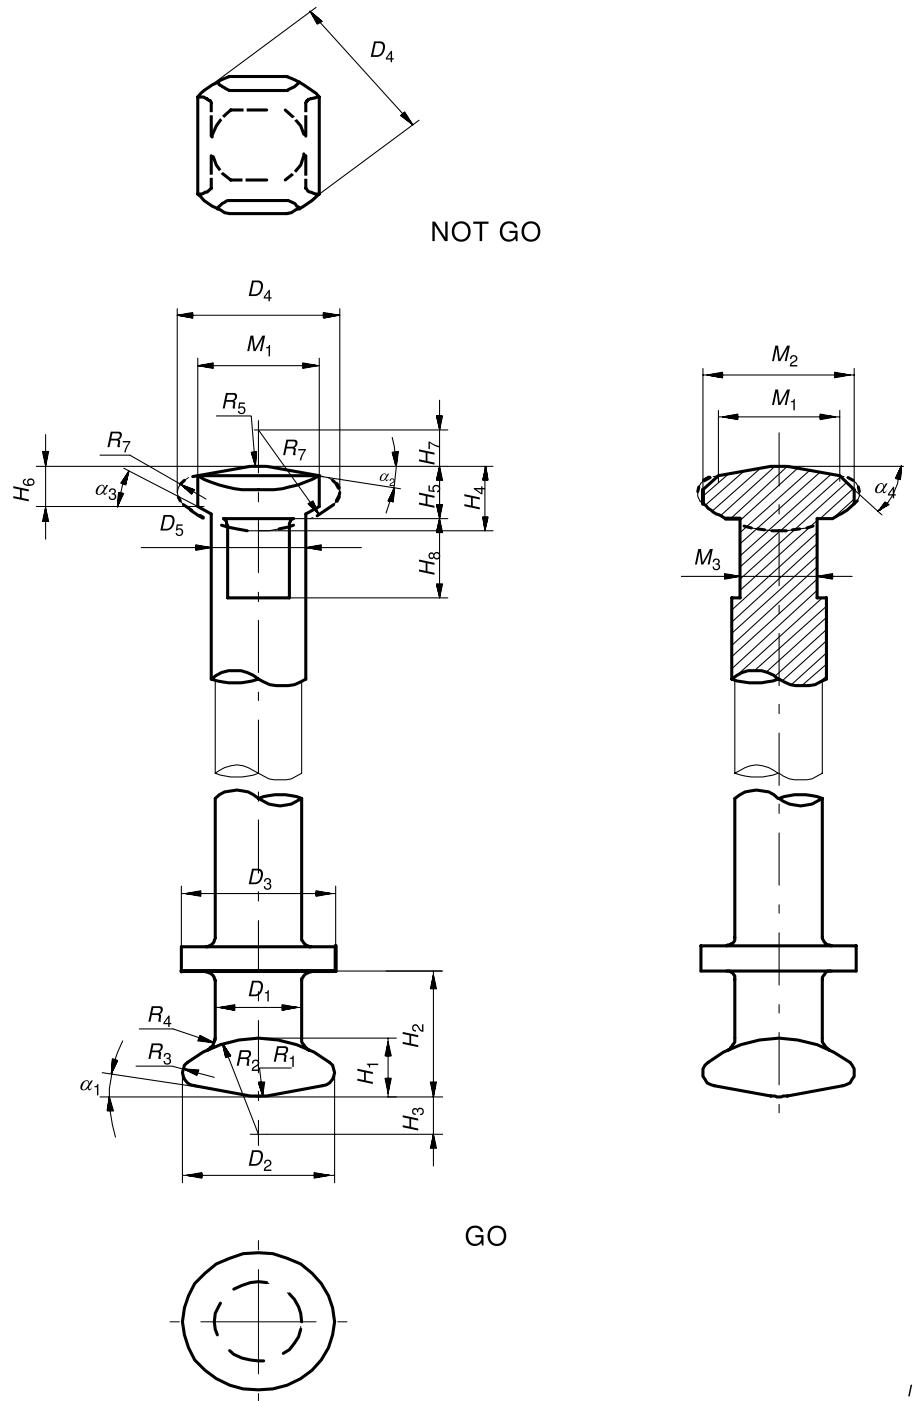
Dimensions of NOT GO and GO gauges for socket couplings
